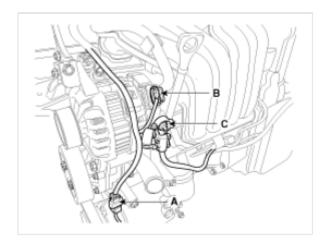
Identifying Intake And Exhaust Oil Control Valve Connectors Courtesy of HYUNDAI MOTOR AMERICA
